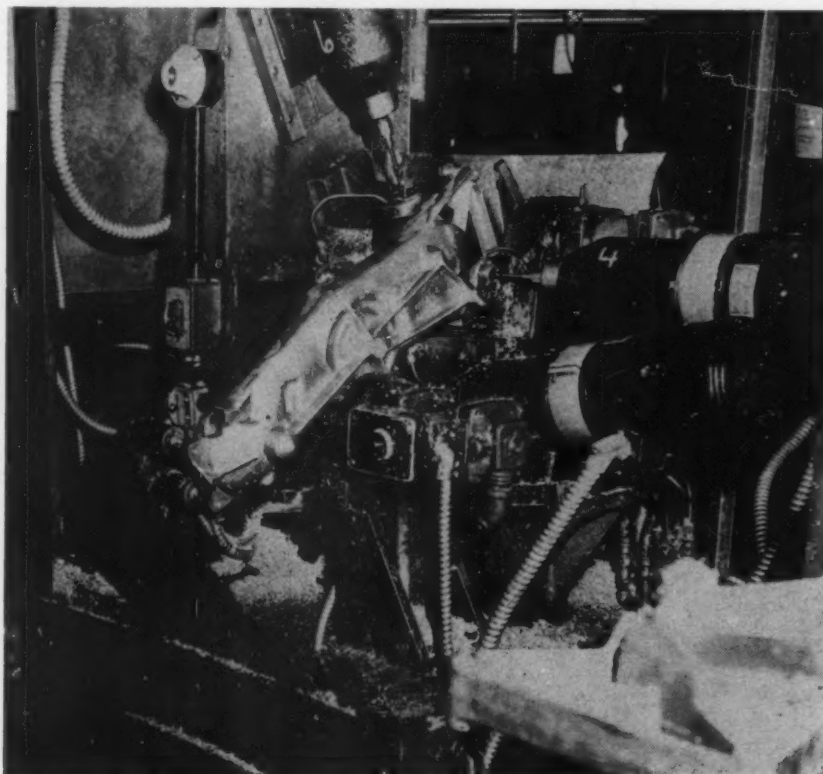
Drilling of six holes is done by tools in six heads on this special machine. The same holes are tapped in a similar machine.
